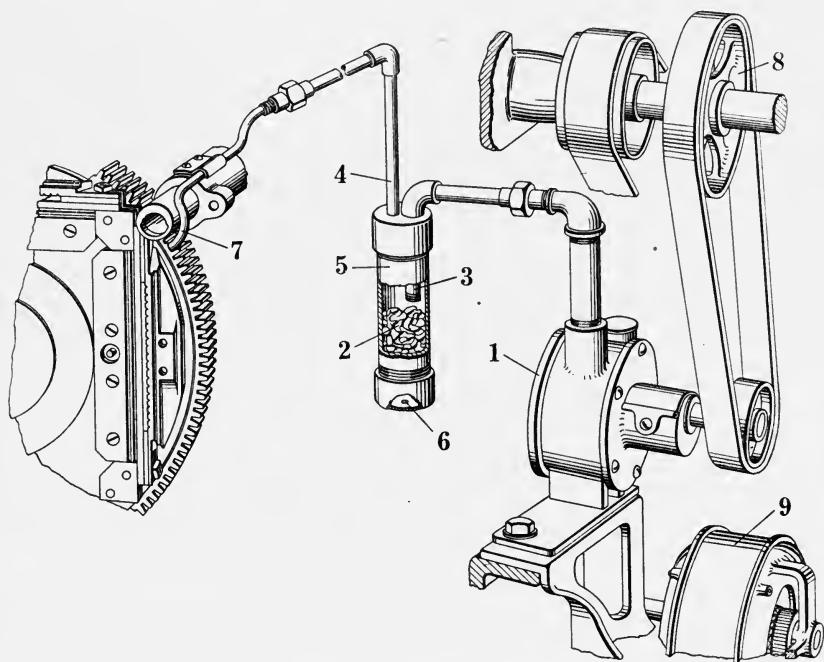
Front View of the Mold Cooling Equipment, terminating in an outlet pipe at 7, which delivers a constant stream of air to the mold face. This equipment is used principally for display machines casting large-bodied slugs. It is also applied to the forty-two-em Intertype.
